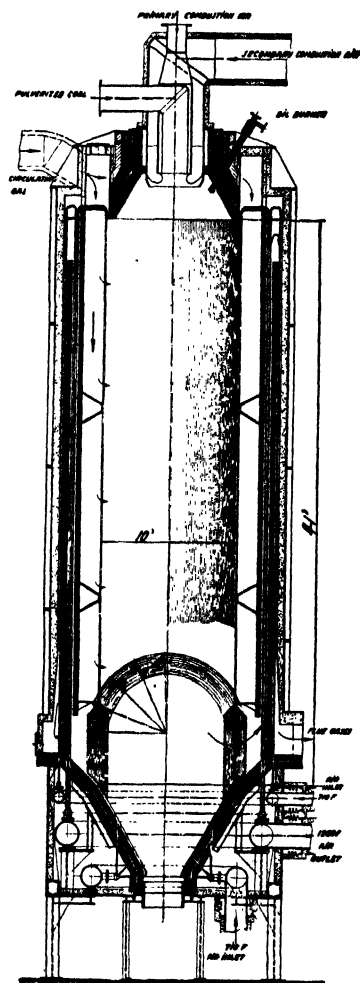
Air Heater for 6000-kw Plant Showing One Design for Pulverized Coal
